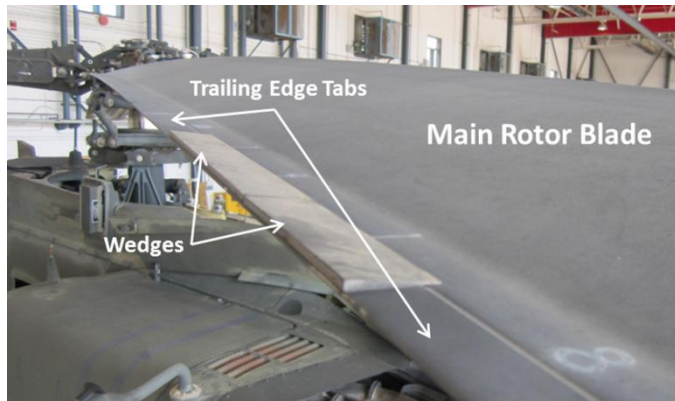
Photograph of Wedges on an AH-64D Apache Main Rotor Blade (Courtesy of 1-151 ARB)
